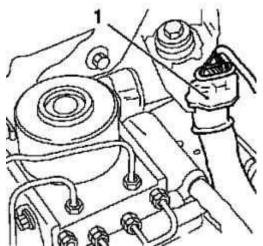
Wiring harness connector electrohydraulic module: 1 - connector
